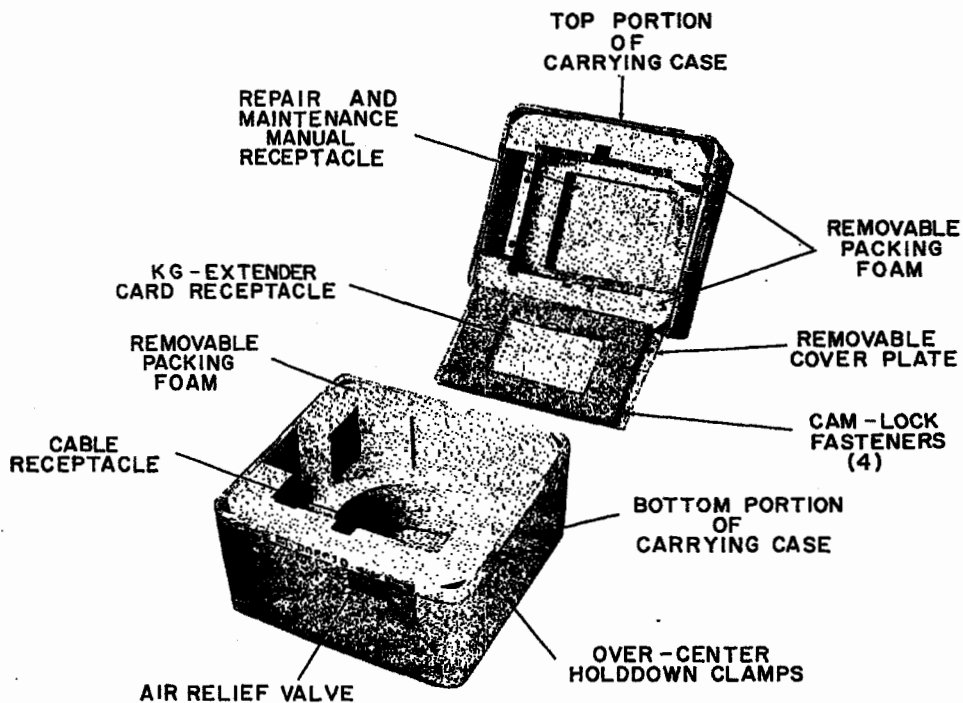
Disassembly of KW-7 Carrying Case.
